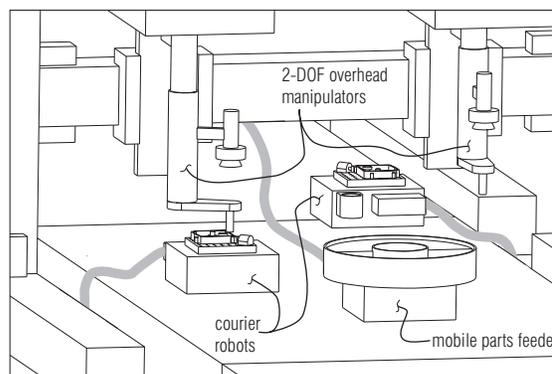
A miniature mobile parts feeder in a minifactory setting: a single feeder supplies parts to multiple low-DOF overhead manipulators.
